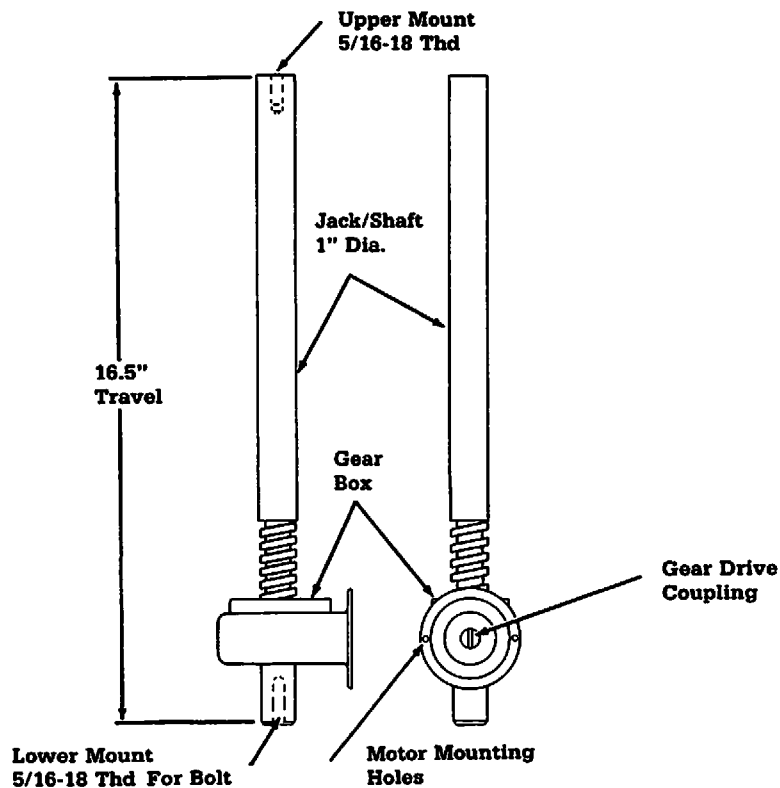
Gearbox and Jack-Shaft Assembly.
